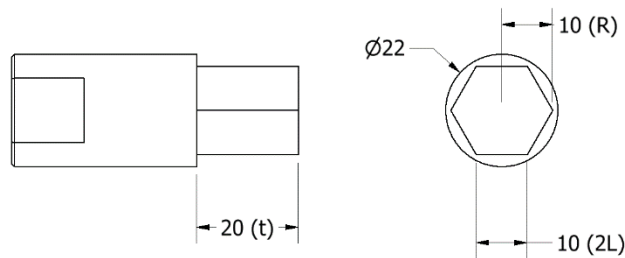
Front and end elevation of old blade shaft (dimensions in mm).
